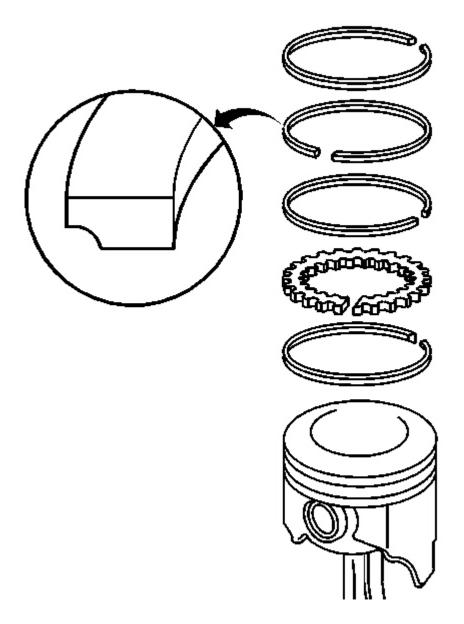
Installing Middle Ring (Compression Ring) Courtesy of GENERAL MOTORS CORP.
